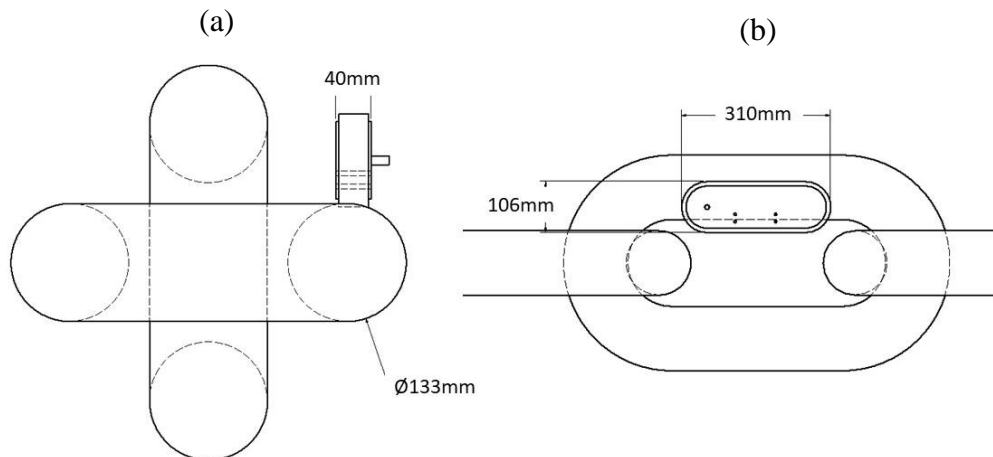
Basic tracked-wheel unit dimensions; (a) tracked-wheel unit placement on the chain surface; (b) tracked-wheel unit length with respect to the chain link–link distances
